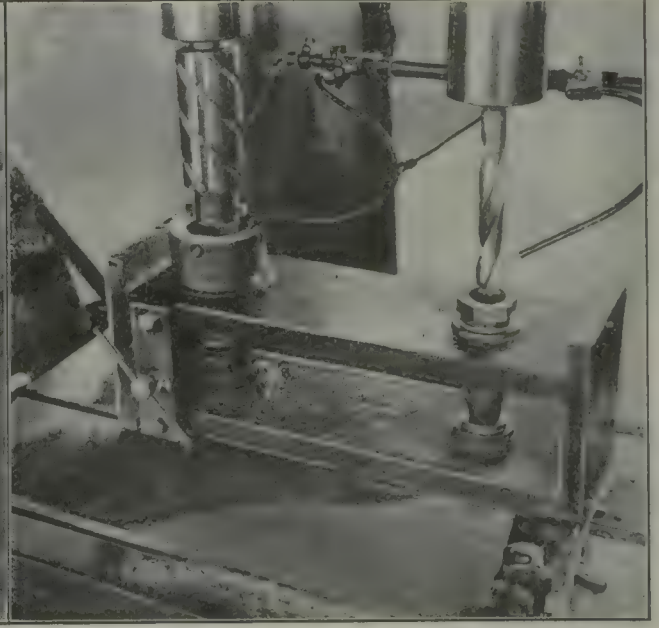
MACHINING CRANKSHAFT AND WRISTPIN HOLES
